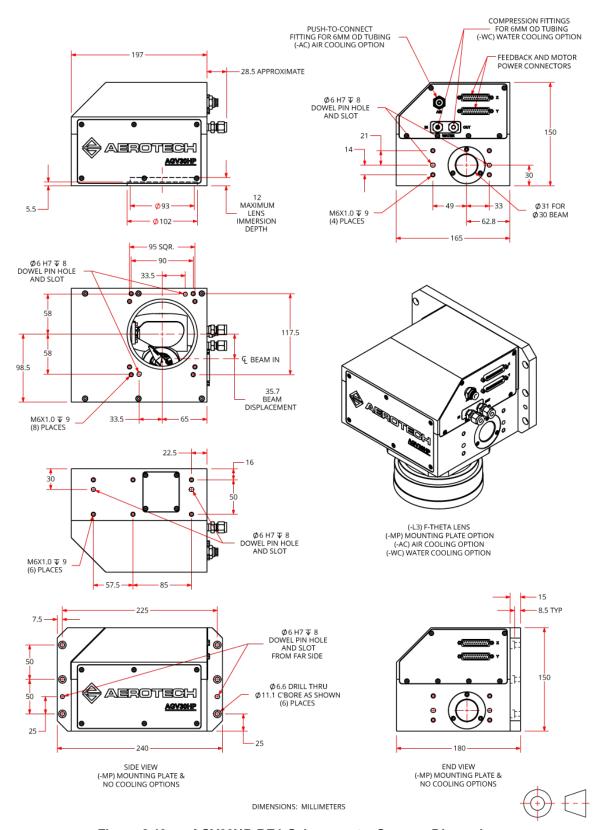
AGV30HP-BE1 Galvanometer Scanner Dimensions
